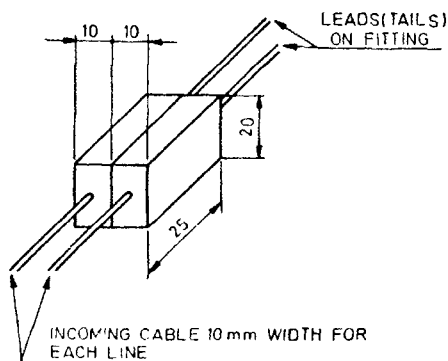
TERMINAL BLOCK ARRANGEMENT FOR INSTALLATION TEST FOR LUMINAIRES WITH CONNECTING LEADS (TAILS)
